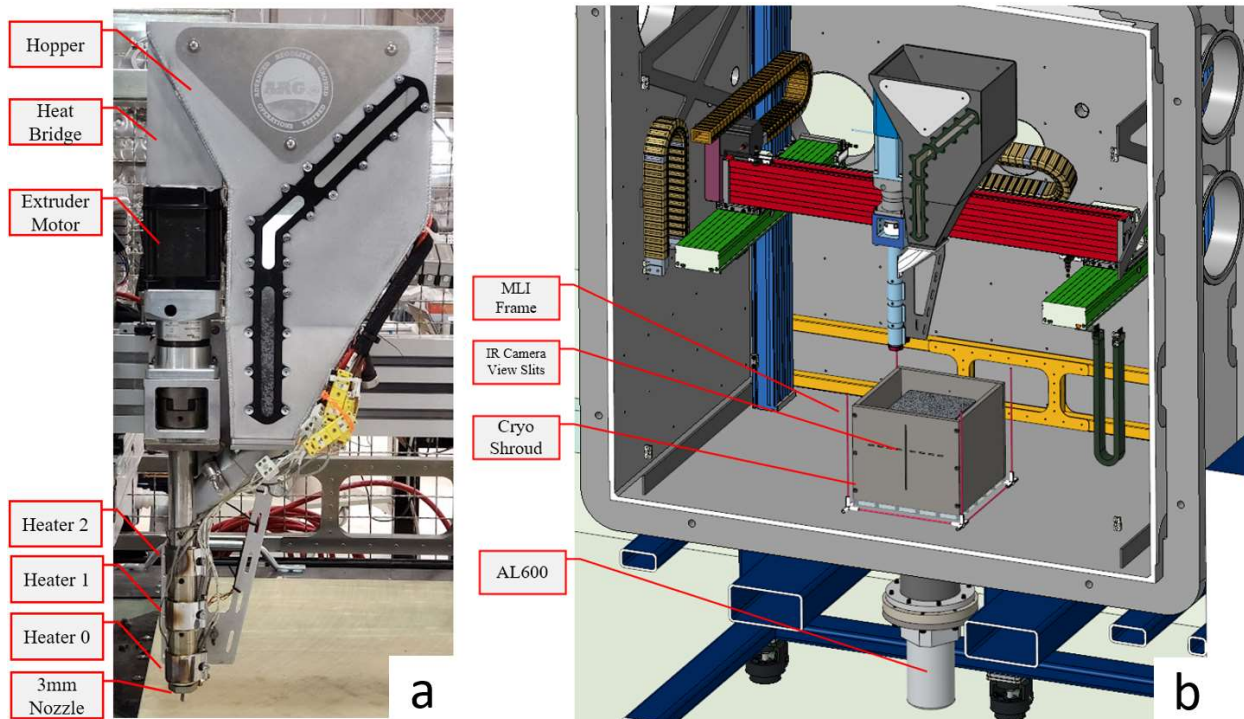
The RPC pellet extruder with heat zones use independent closed loop PID control in Klipper firmware and 17 L hopper (a). The cryo-shroud inside the ASSIST chamber with the AL600 cryocooler attached to the bottom of the cryo-shroud (b).
